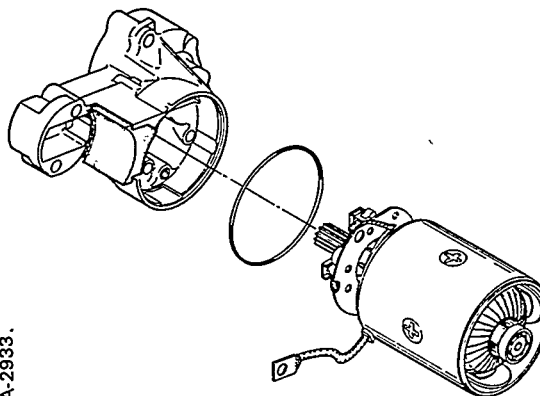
FIELD COIL HOUSING/CENTER HOUSING ASSY.
